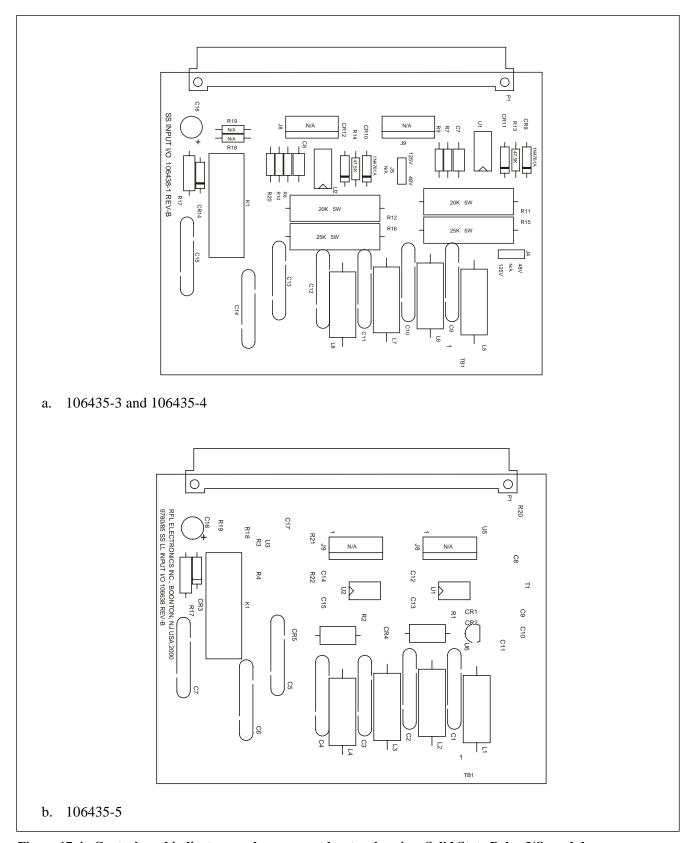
Controls and indicators, and component locator drawing, Solid State Relay I/O module
